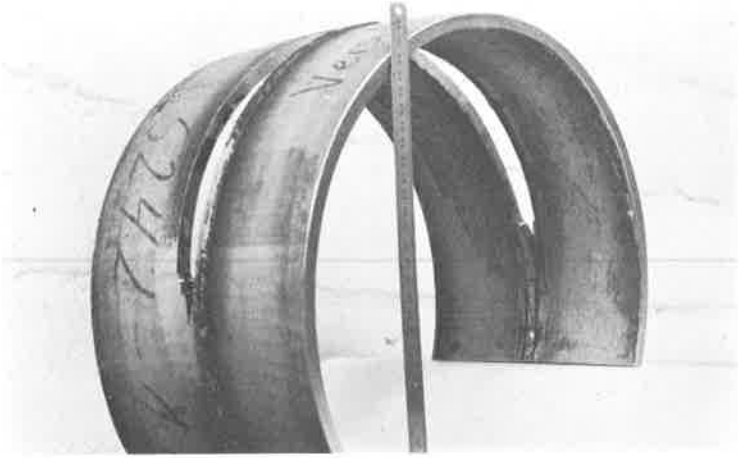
Pipe section with circumferential crack at the welded joint after being cracked. No. 1.4948 (Type AISI 304) steel.
